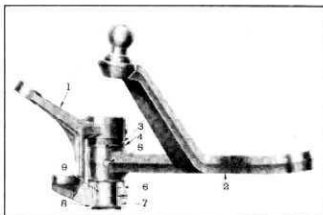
Steering Idler and Third Arm and Bracket Assembly
